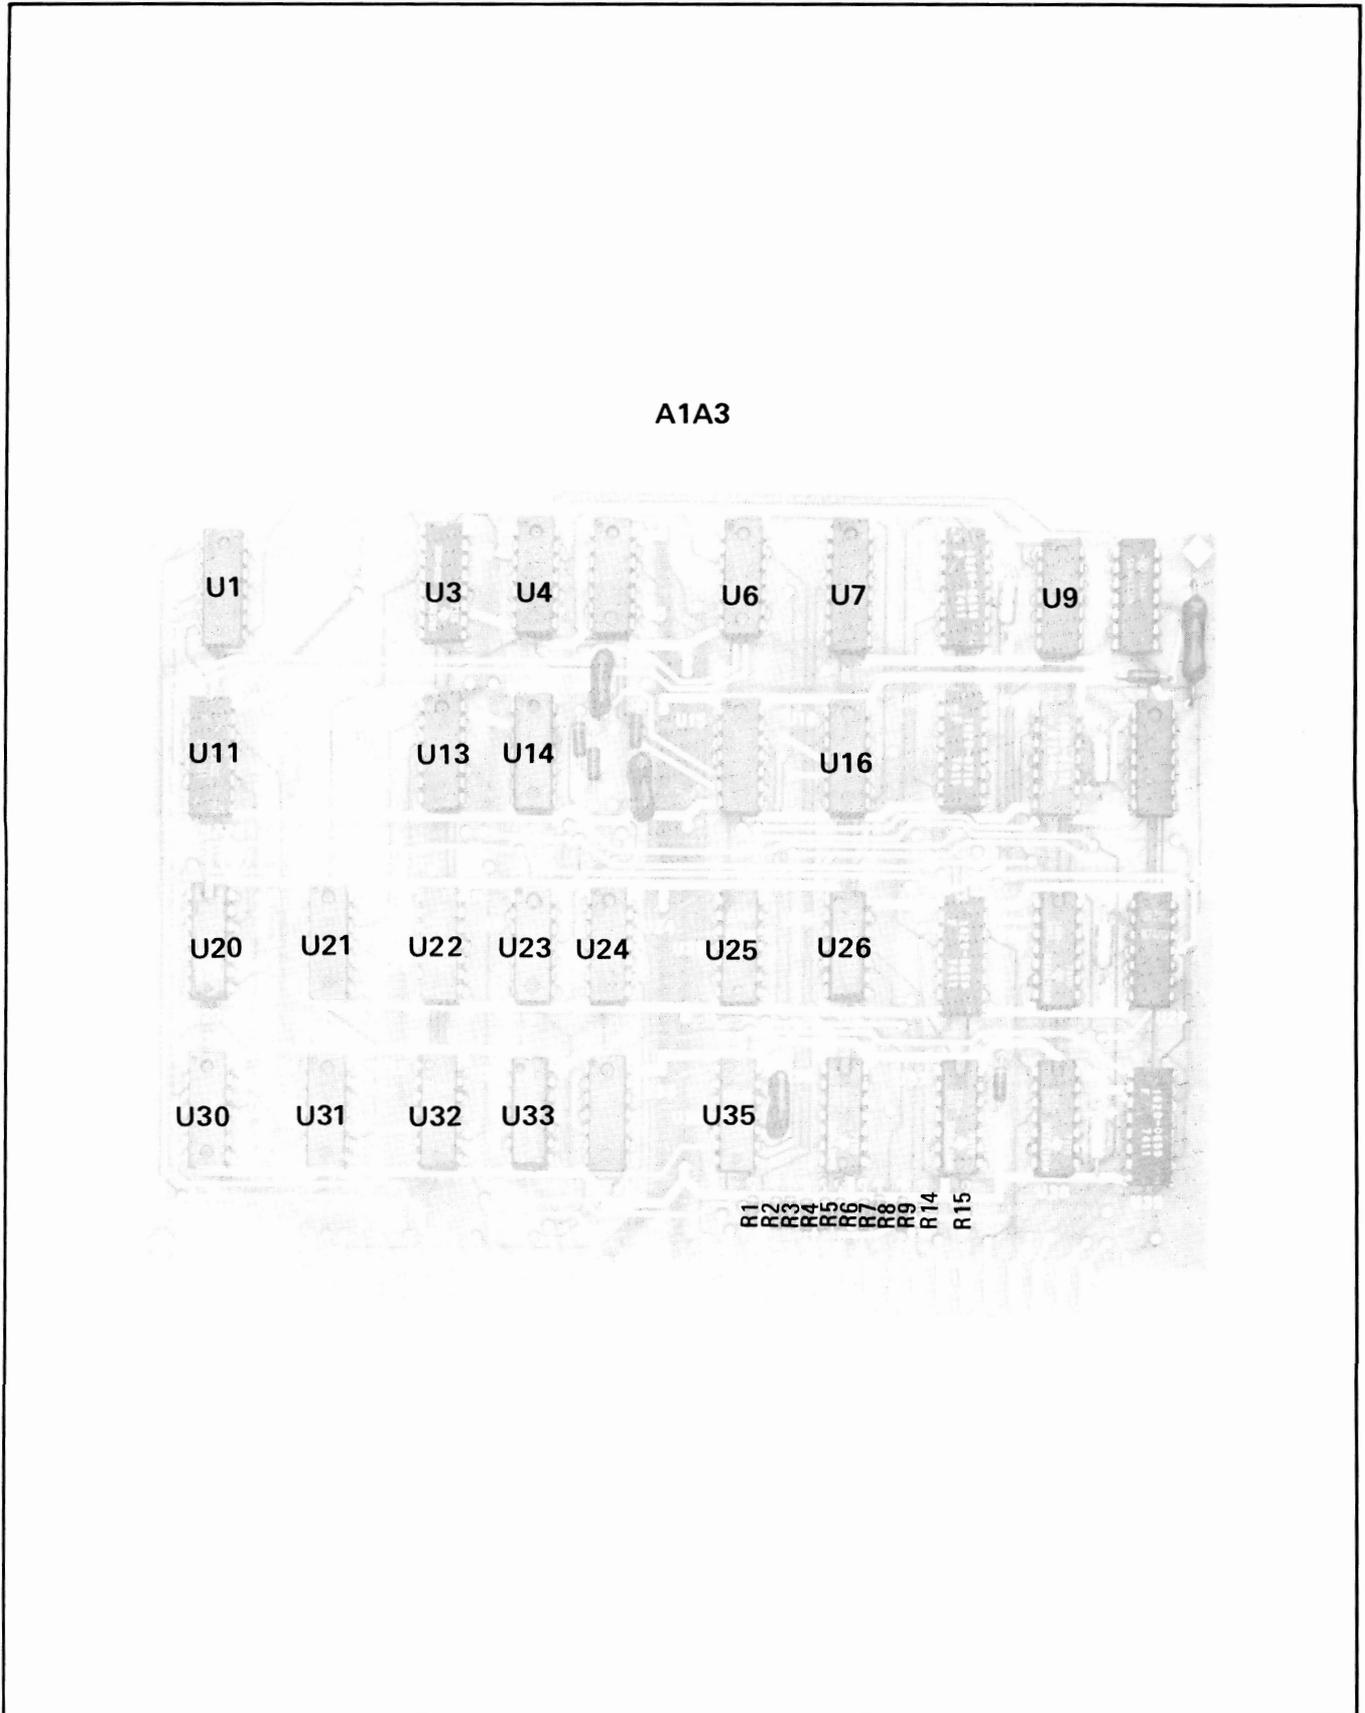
P/O A1A3 Readout Control Assembly Component Locations (Part 1)
